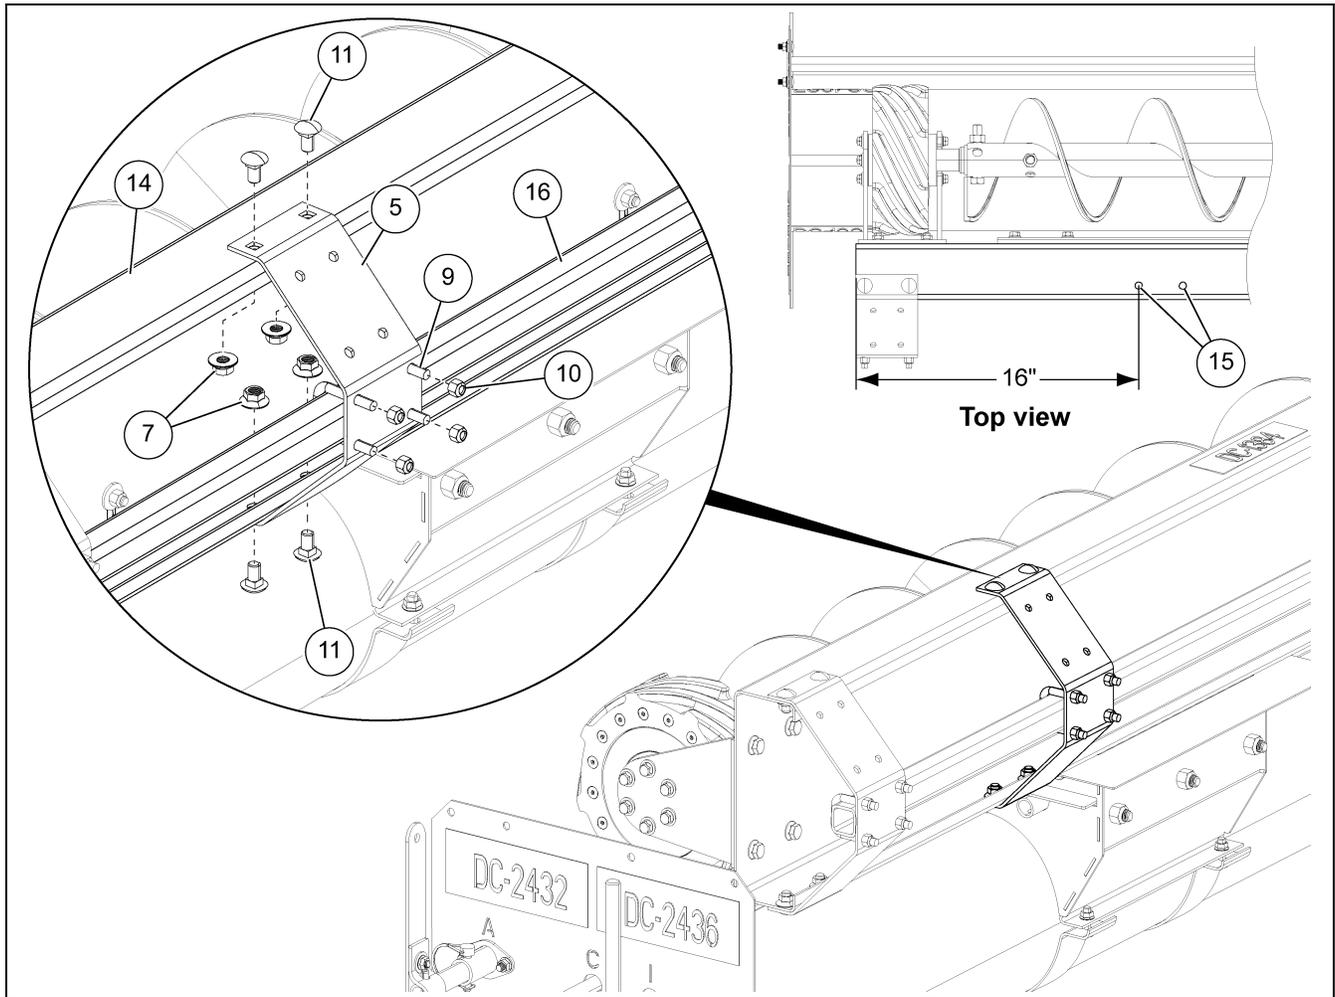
Installing the Torque Tube Bracket to the Backshield for Retrofit
